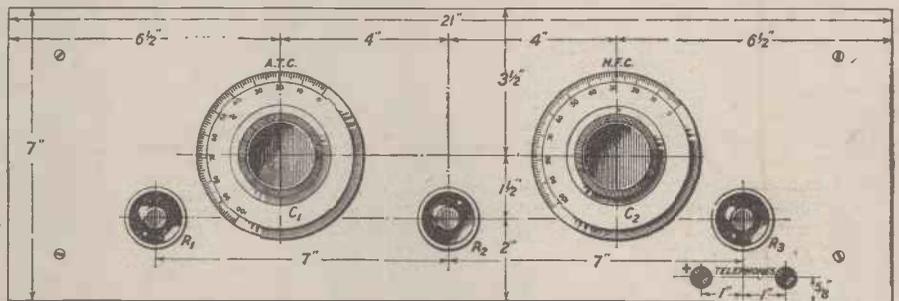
All drilling centres can be obtained from this dimensioned layout, providing similar components are used.
